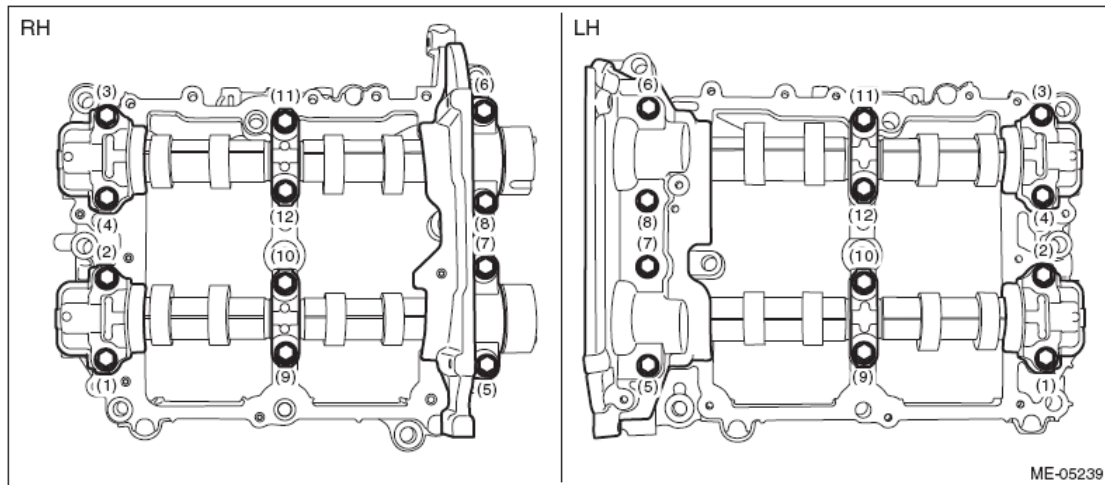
Identifying Exhaust Camshaft Cap Bolts Loosening Sequence
